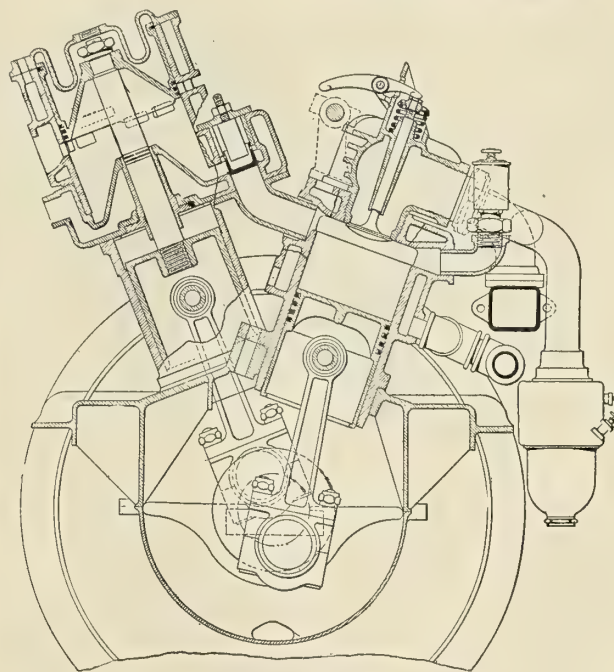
SECTIONAL VIEW OF ENGINE.
